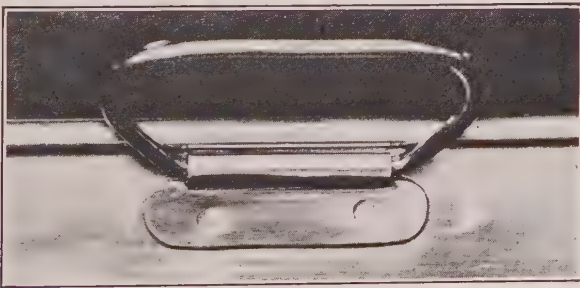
A SPOT-WELDED JOINT.
